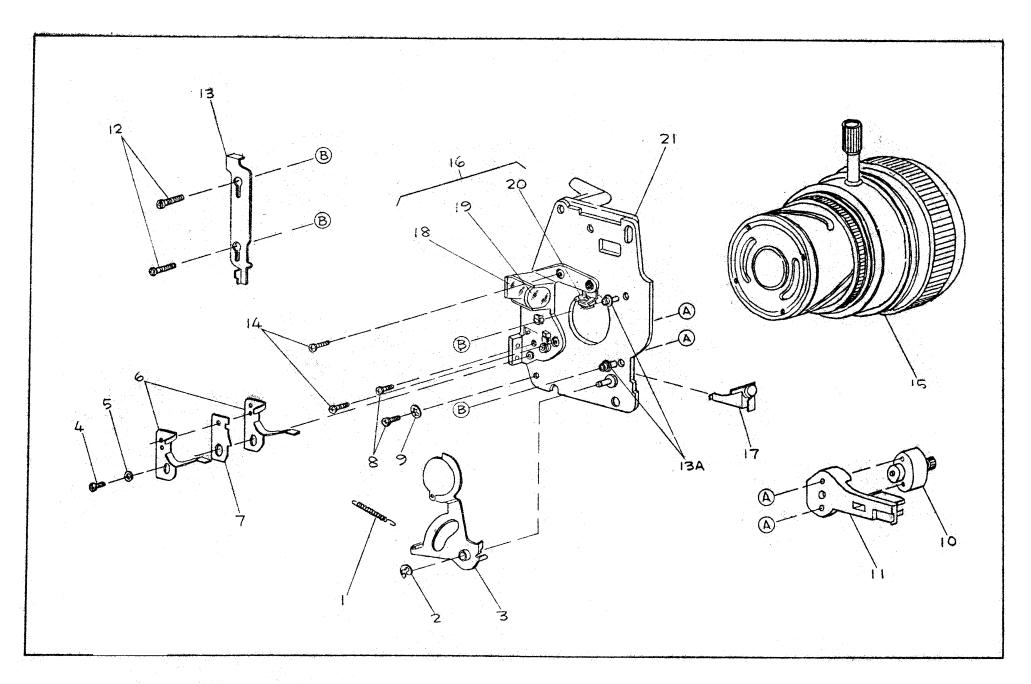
Zoom Lens Assembly - OBJECTIF COMPLET
